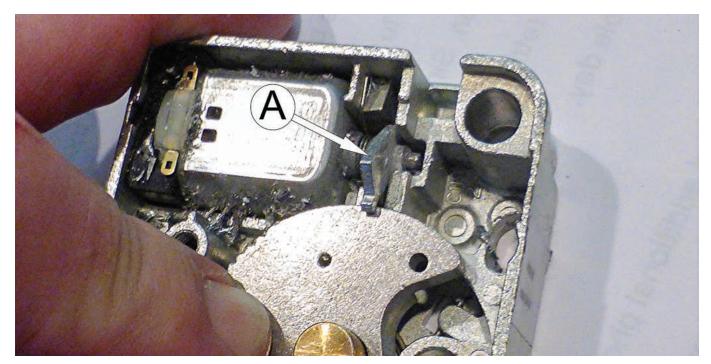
Here, the blocking cam at "A" has been rotated up, allowing the swing bolt to move to open the safe.
